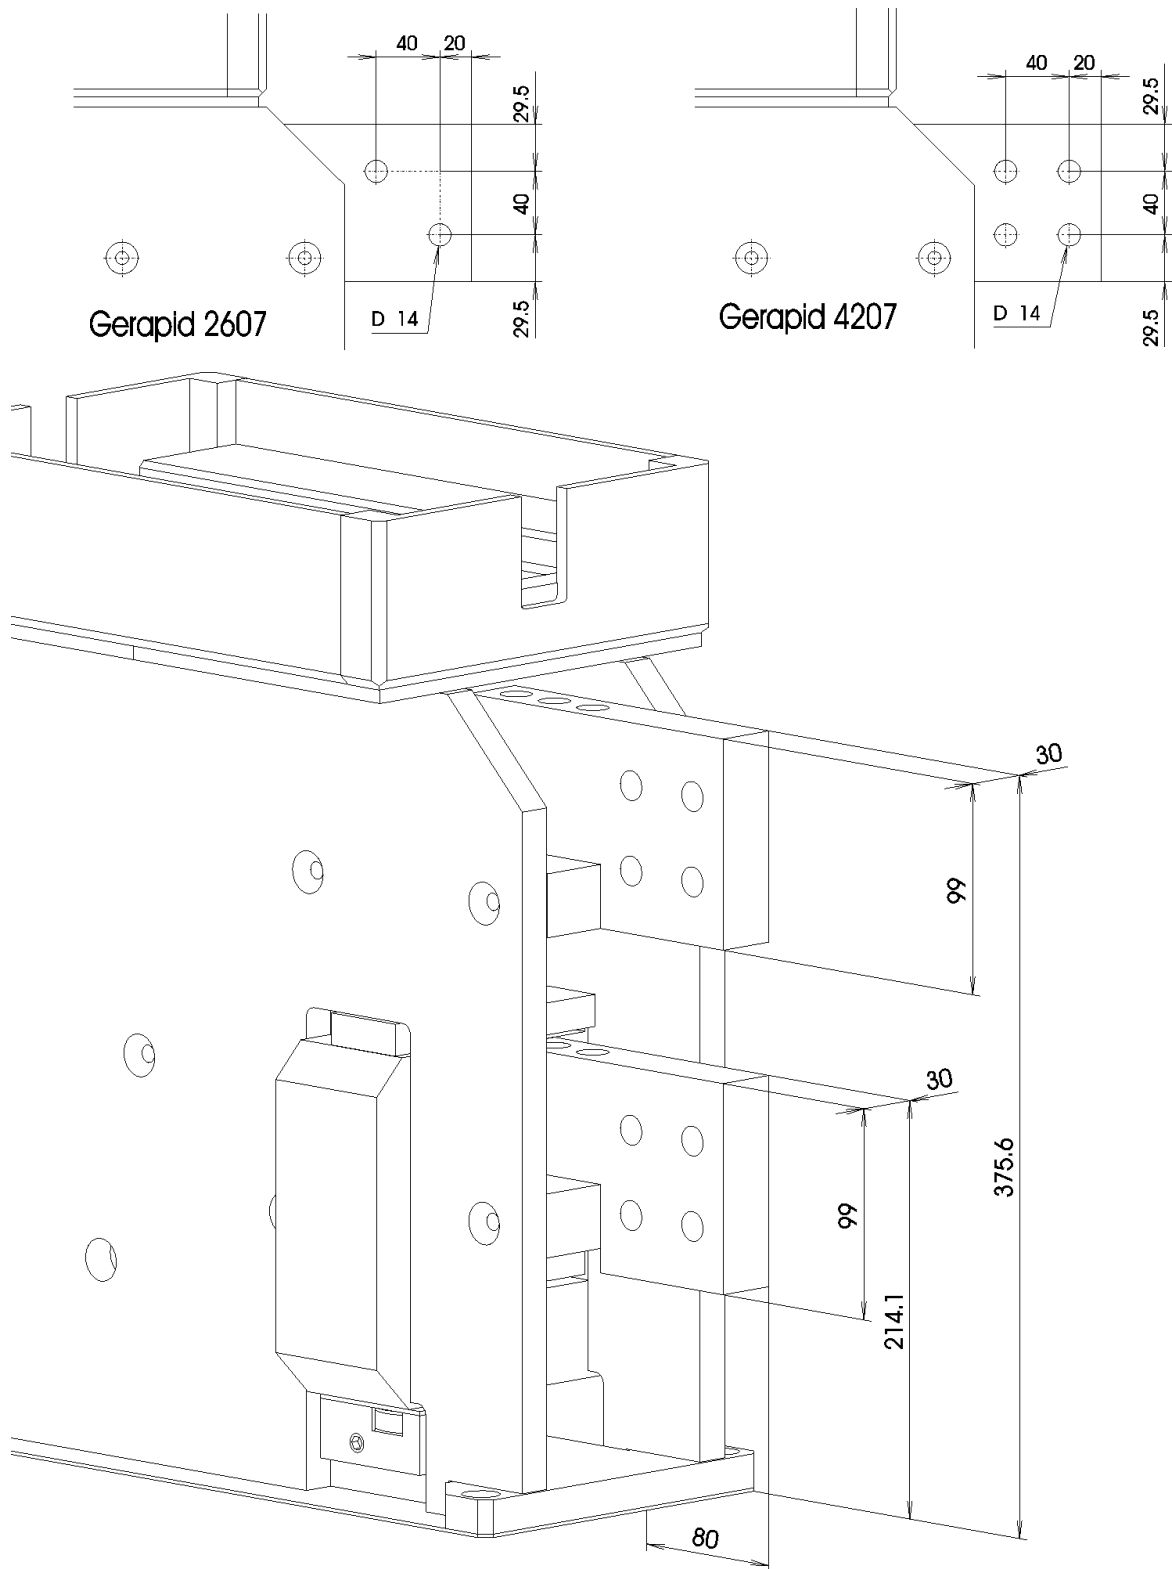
Gerapid 2607 / 4207 connections vertical (Dimensions in mm)
